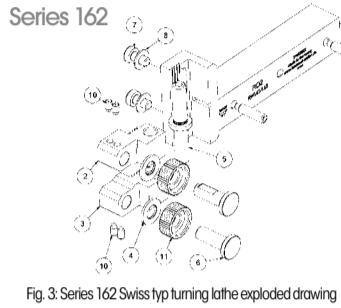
Series 162 Swiss typ turning lathe exploded drawing
